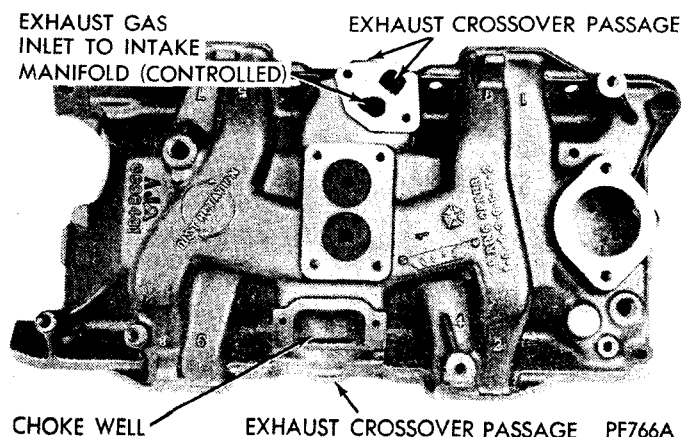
Intake Manifold 318 and 360 Cubic Inch Engines (Typical)
